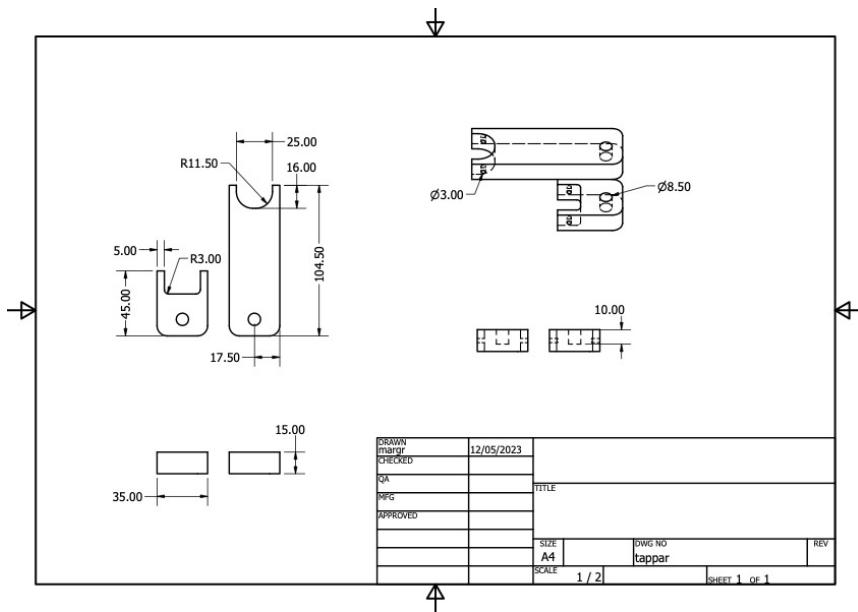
CAD drawing of the upper and lower mounting brackets.
